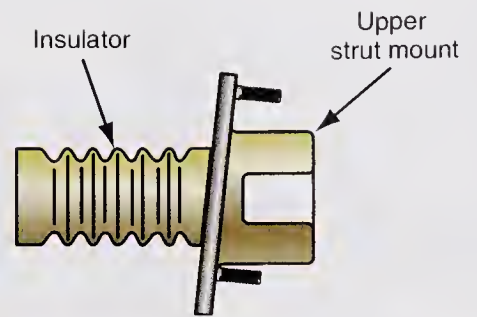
Upper insulator and upper strut mount installed on coil spring.
